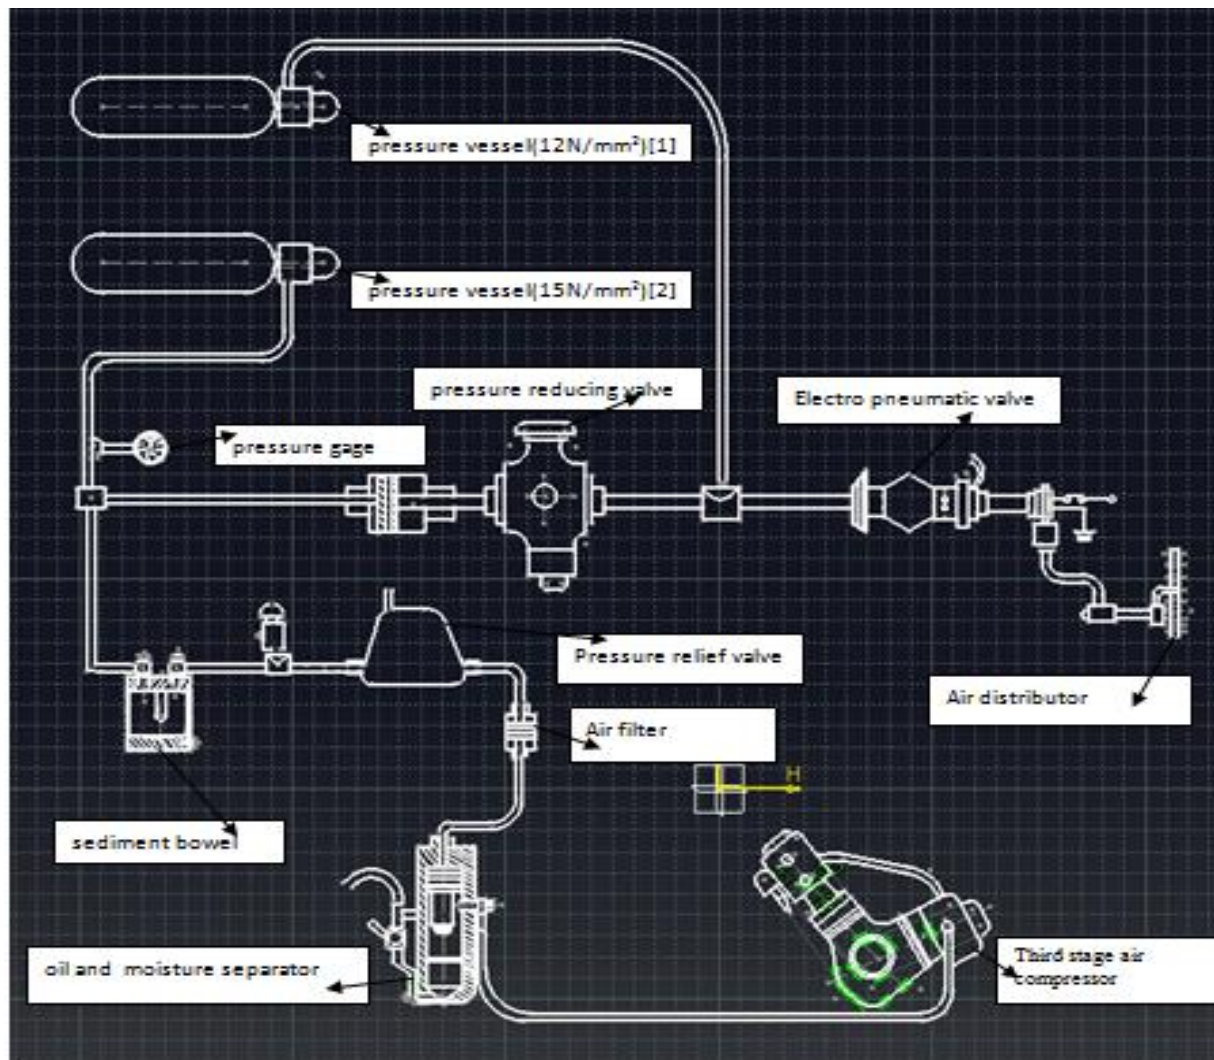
modeling of compressed air engine starting system for Diesel-electrical Locomotive
